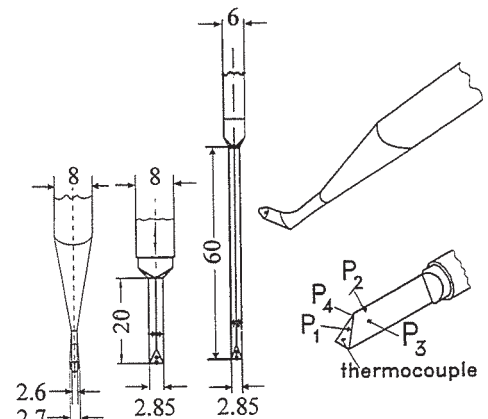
Dimensions of the two four-hole wedge probes and the five-hole cone probe
